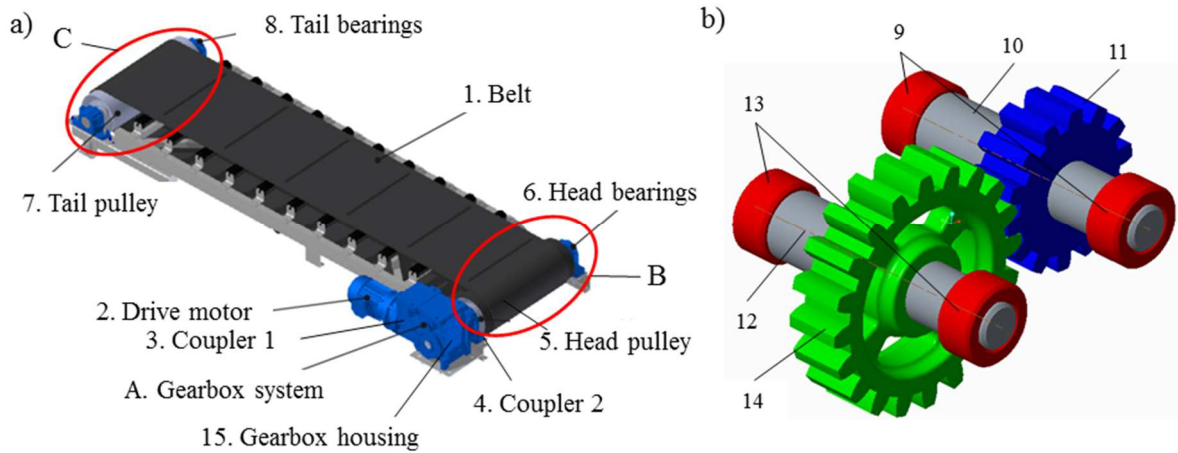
(a)-Conveyor system and (b)-its gearbox A
